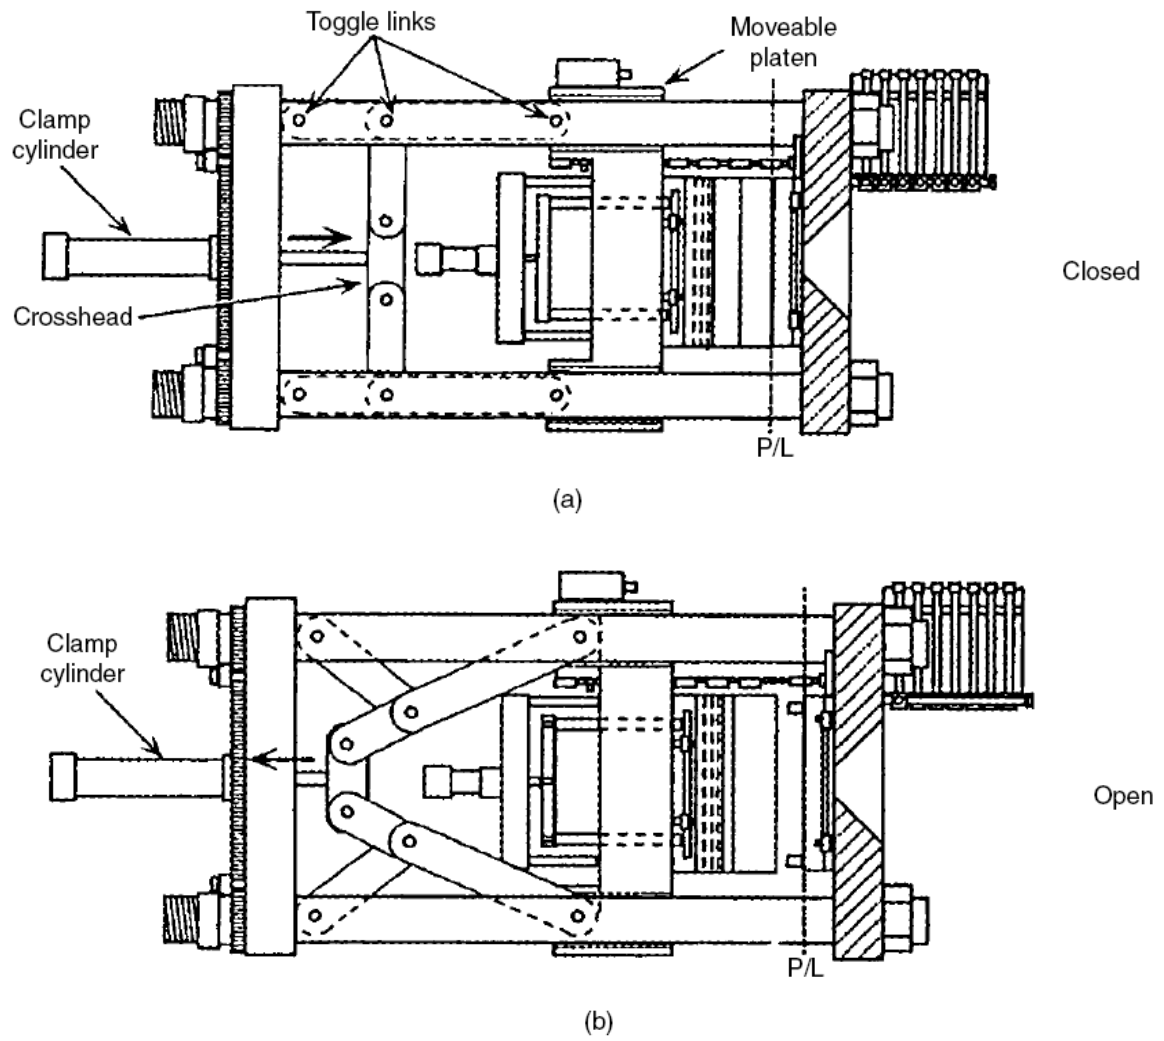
Toggle clamping unit¹⁴⁶: (a) closed and (b) open.
